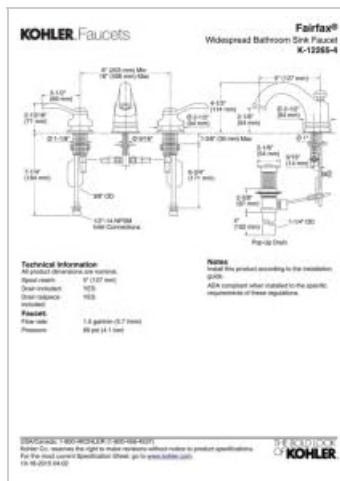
Detailed technical drawing with installation notes for the Kohler Fairfax Widespread Bathroom Sink Faucet (K-12265-4 model shown, similar to K-12265-4-2BZ).
